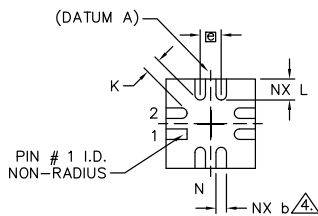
8-pin QFN (1.7 mm × 1.7 mm × 0.6 mm) LG08A Package Outline, 001-49591
